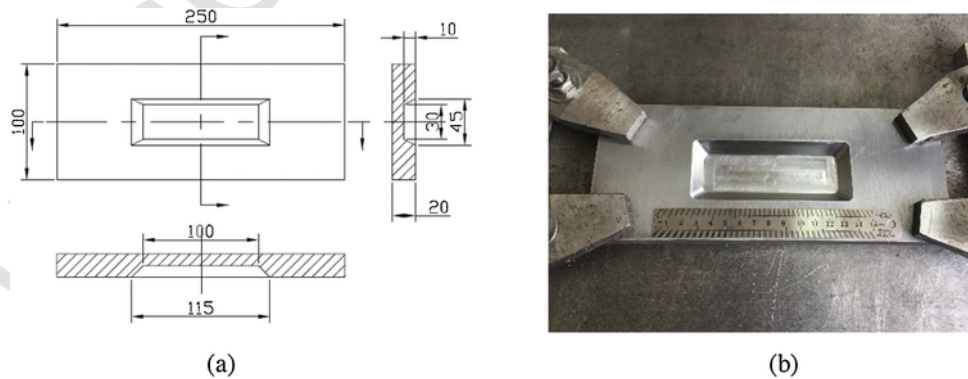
The specimen with a groove shaped by machining: (a) geometries of the specimen (unit: mm) (b) the fabricated specimen.
